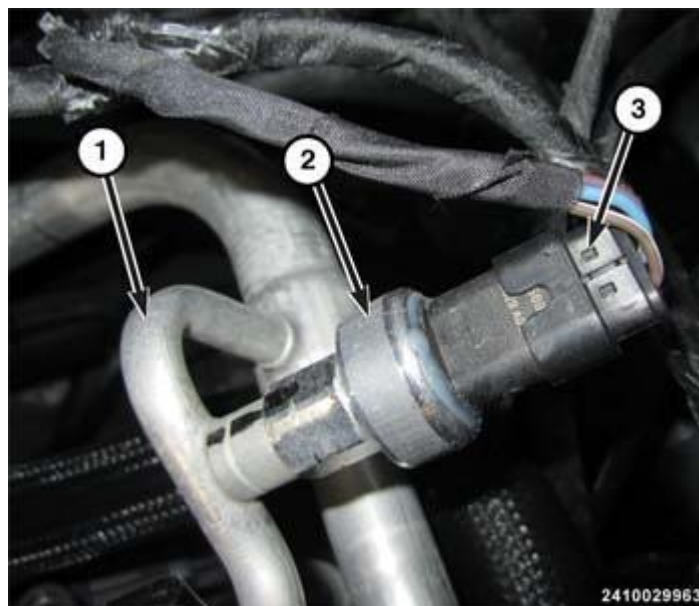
Internal Heat Exchanger, Pressure Transducer & Harness Connector
